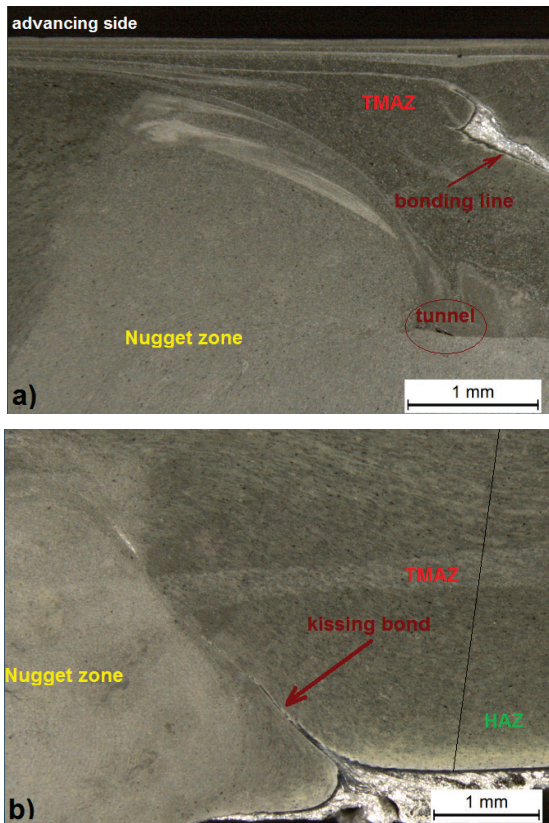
Types of defects in weld metal of AA 5052-H32
